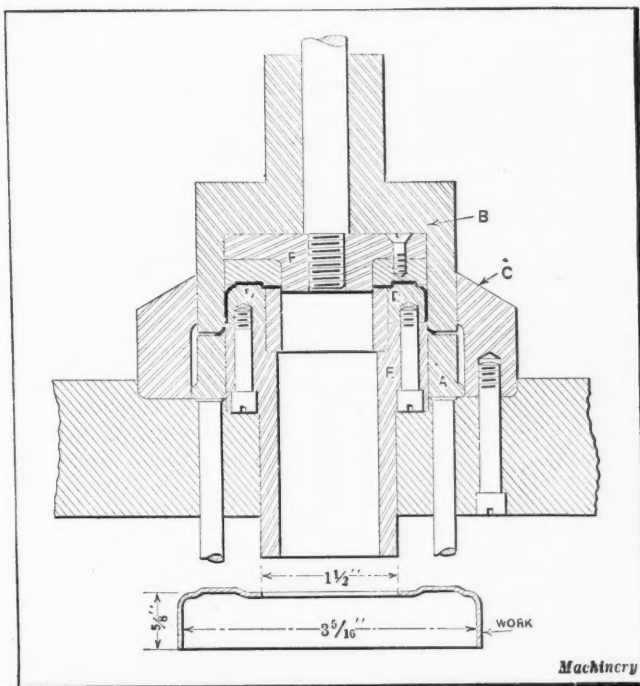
Performing Blanking, Drawing, Trimming and Punching Operations in a Single Stroke of the Press
